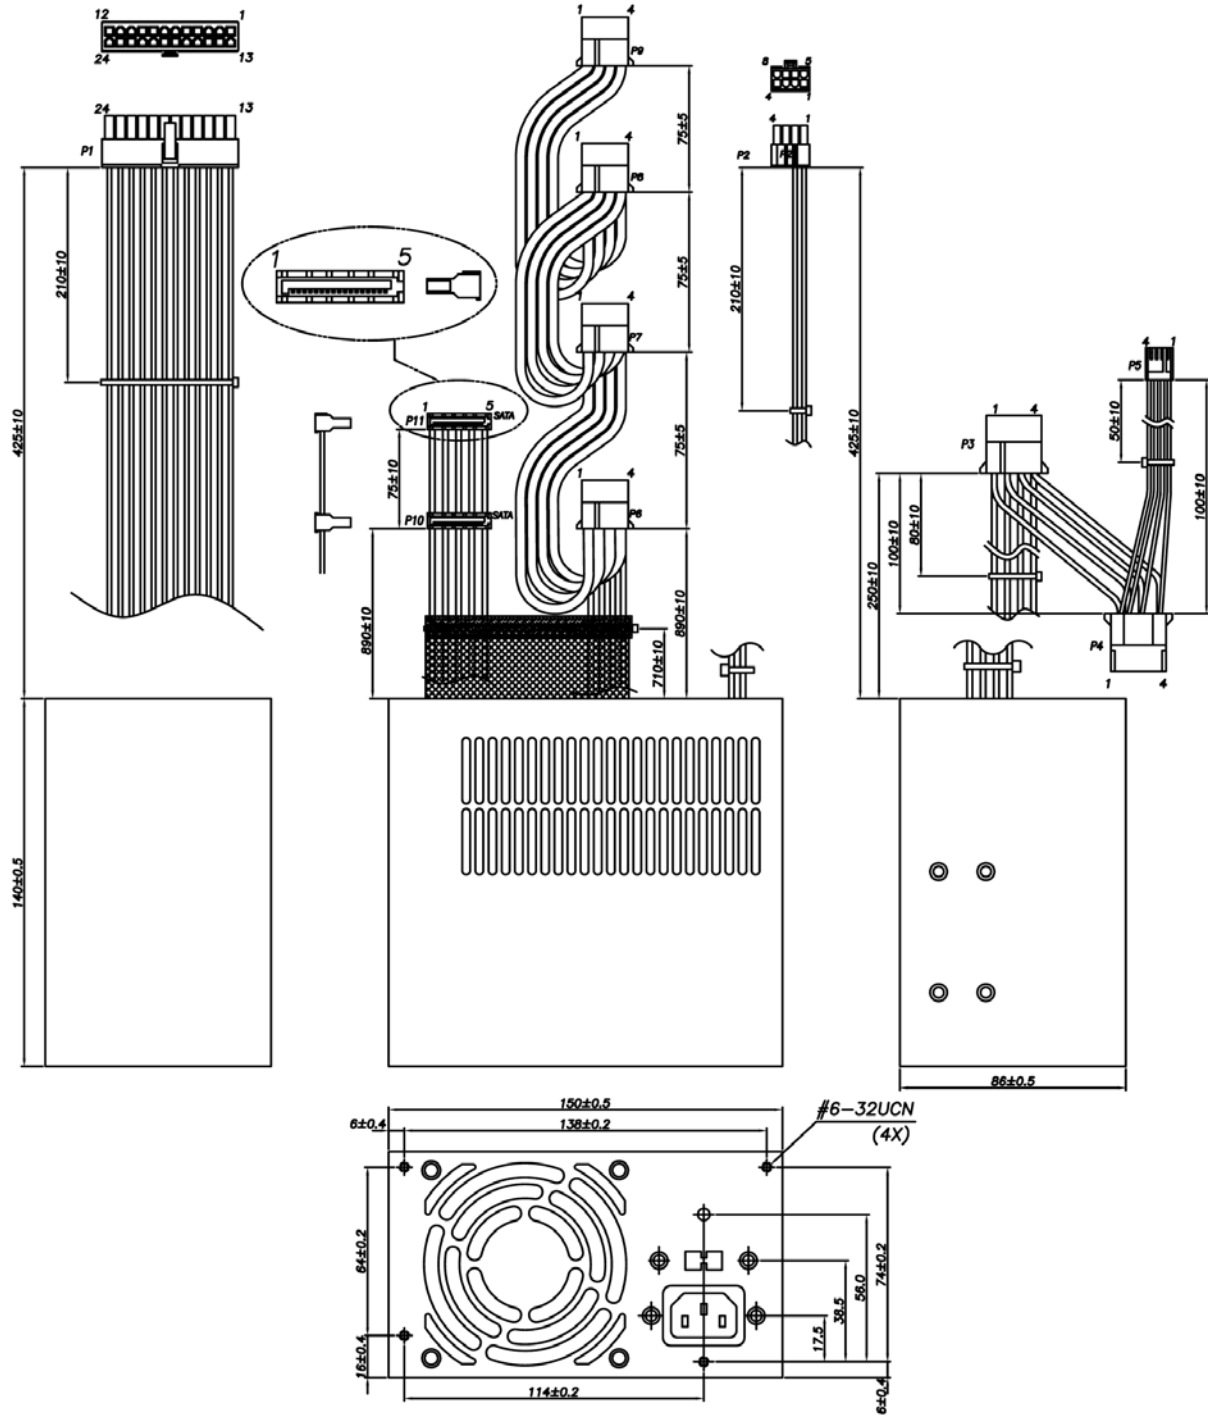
Mechanical Drawing for Power Supply Enclosure and Output Cable Harness
